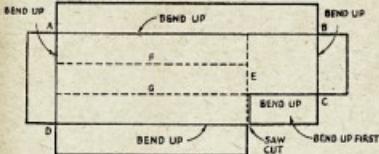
Bending instructions for the mixer housing. Dimensions are available from Fig. 1. Partitions F, E, and G, indicated by dashed lines, are soldered in place after the bending operation is completed. Note that the lower lip of the if. output portion at the right should be bent up first.
